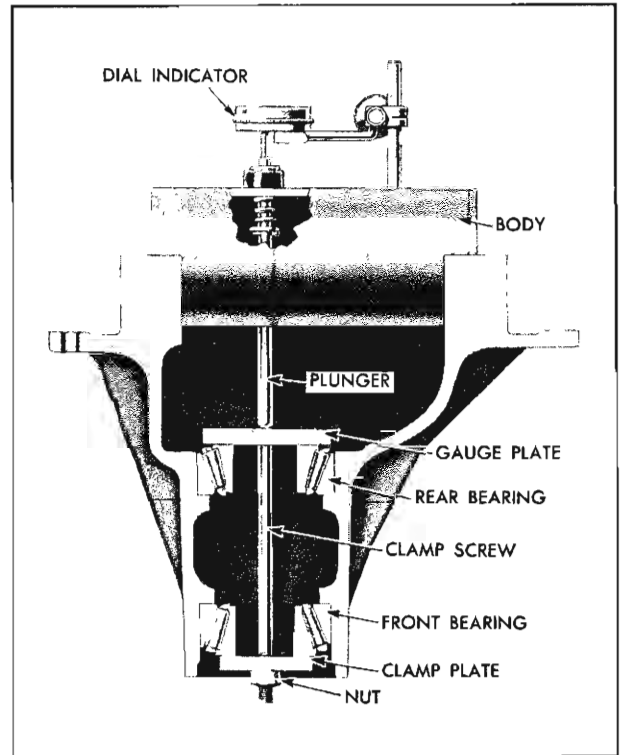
Cross Section of Differential Carrier and Pinion Setting Gauge
